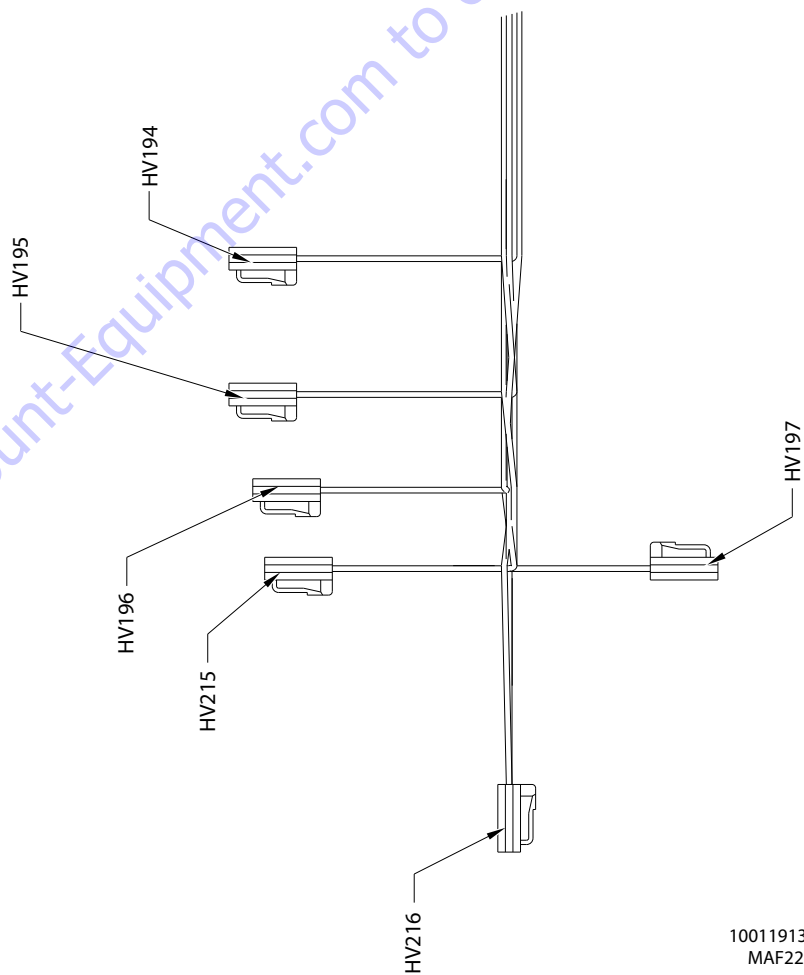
Platform Valve W/O Jib Harness - Sheet 2 of 2
